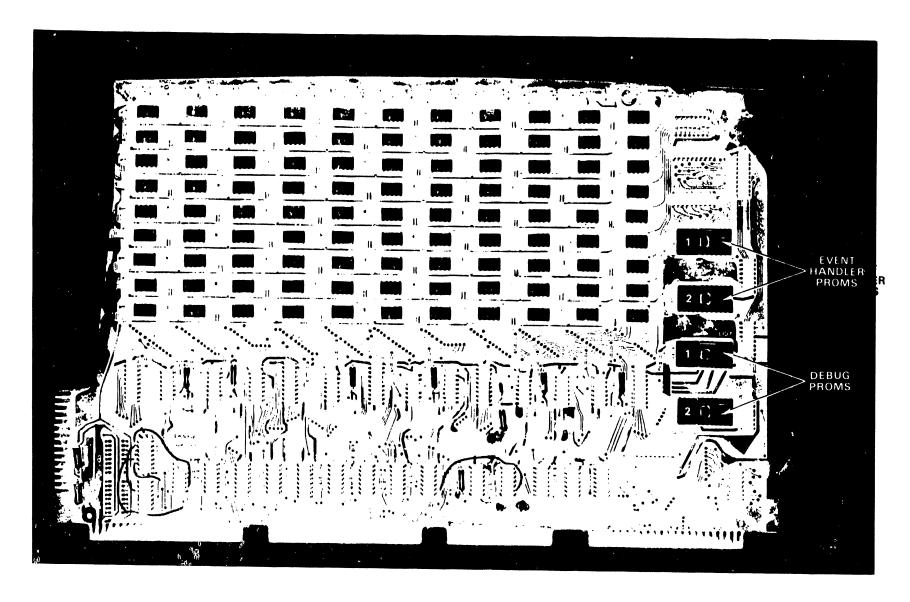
MASTER (5505-1) — MEMORY PCB
